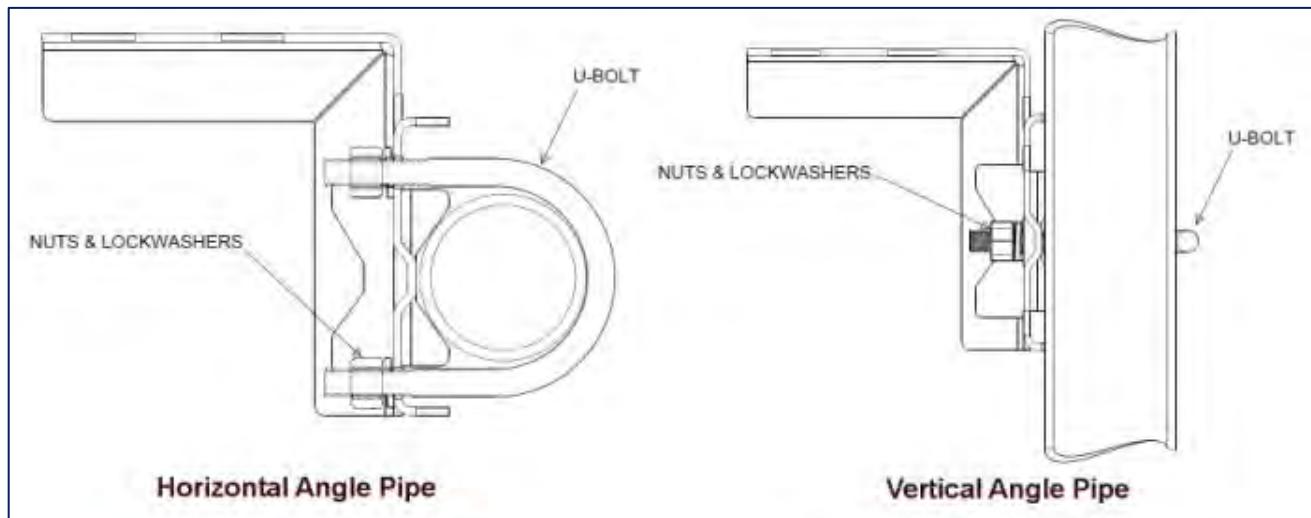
Pipe Mounting Bracket secured to a Horizontal or Vertical Angle Pipe
